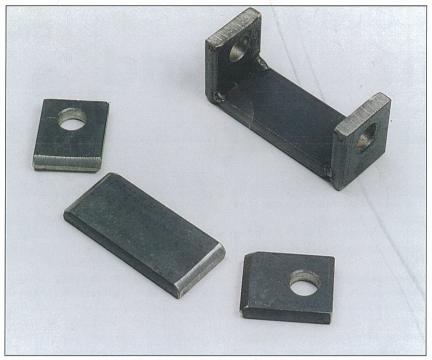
The parts required to make the stub-axle carrier and a set of parts already tack-welded together. (Steve Williams)
